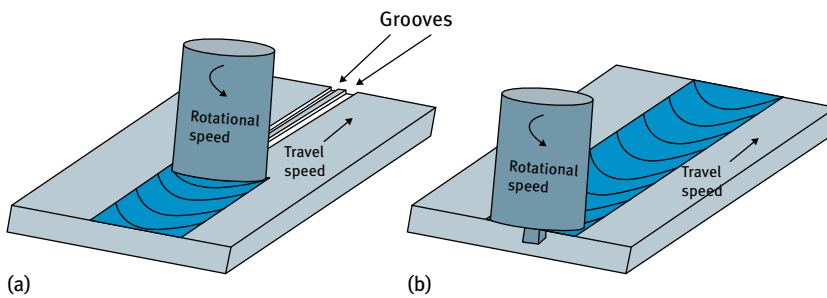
Schematic drawing of friction stir welding.
